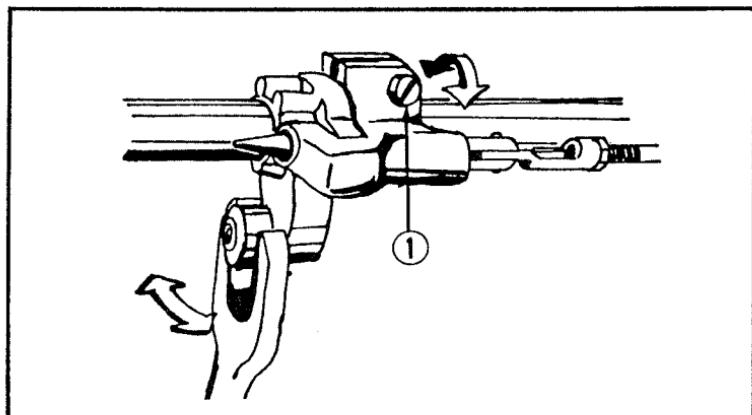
On White side load machines with oscillating shuttles, a feed dog height of .8mm to 1mm can be achieved by moving the drop feed unit either clockwise or counterclockwise.
